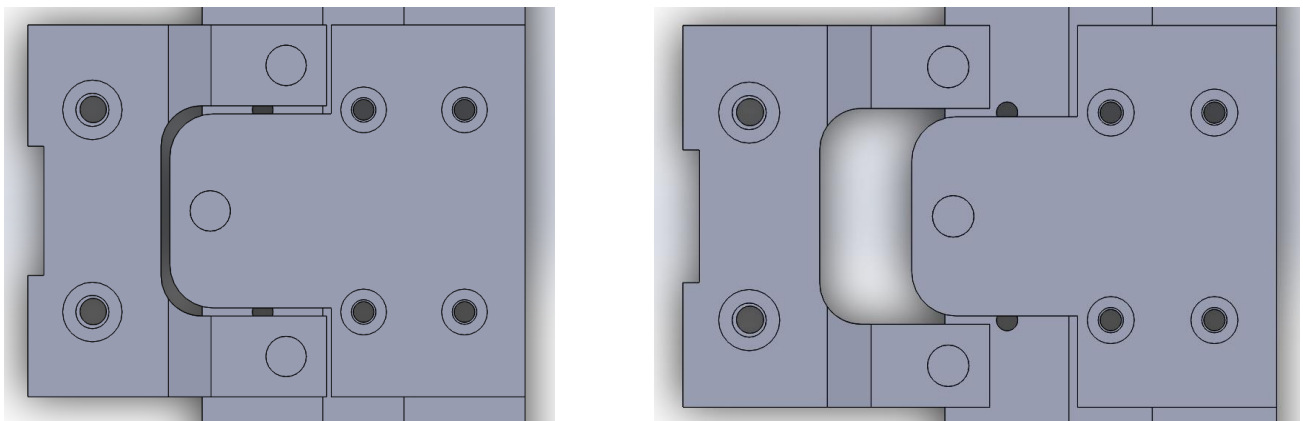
Solidworks drawing from the top view of the tooling showing the home position at 0 displacement on the left and full displacement of 10mm on the right.
